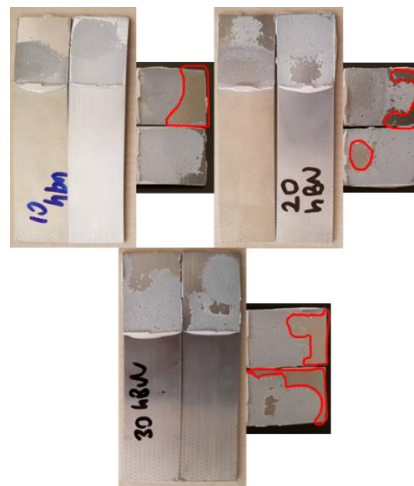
Fracture Surfaces of hBN Particles
